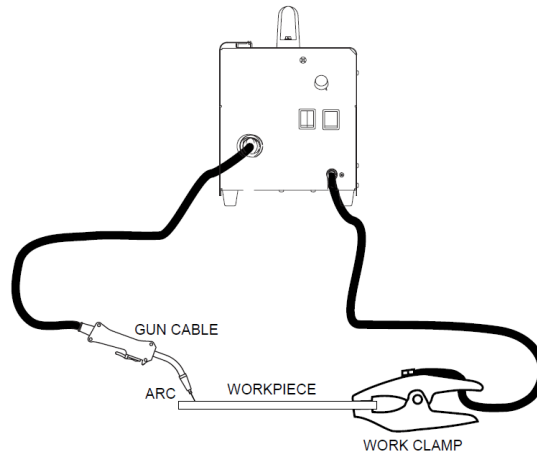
Flux core arc welder cable diagram, from manual
